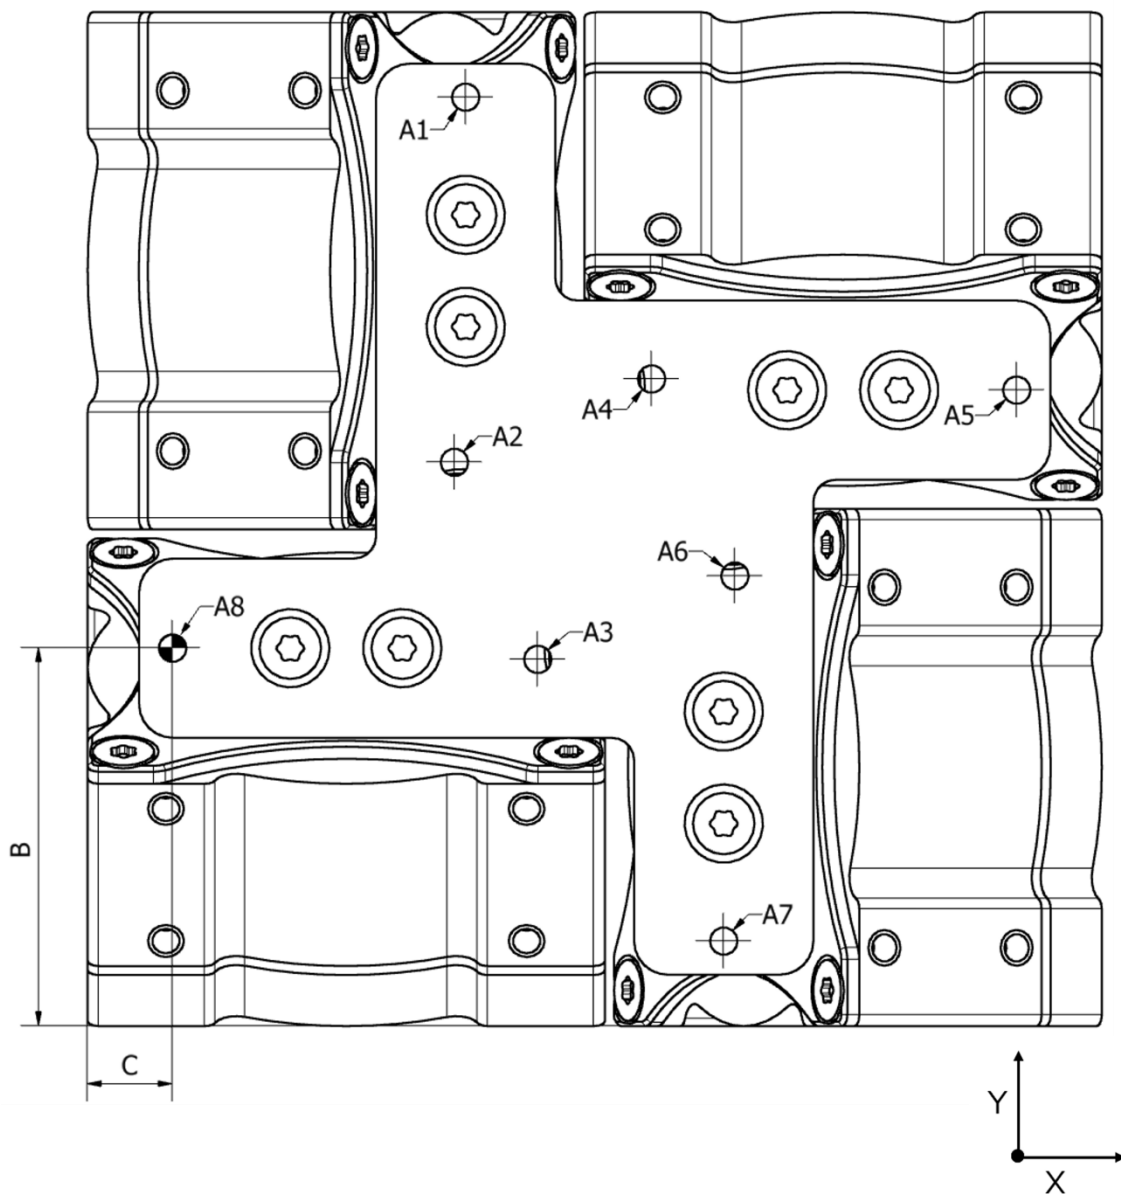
Indicative Dimensions of the CubeWheel Pyramid Base
